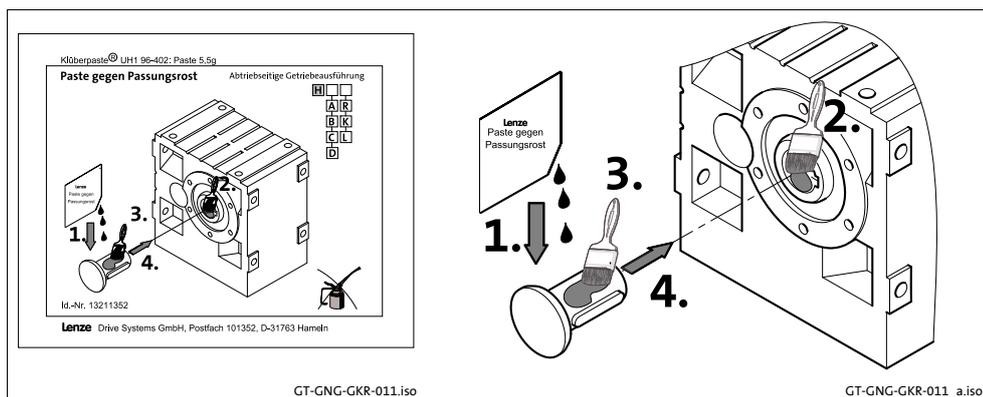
Application of fitting grease against fretting corrosion (can be ordered optionally)
